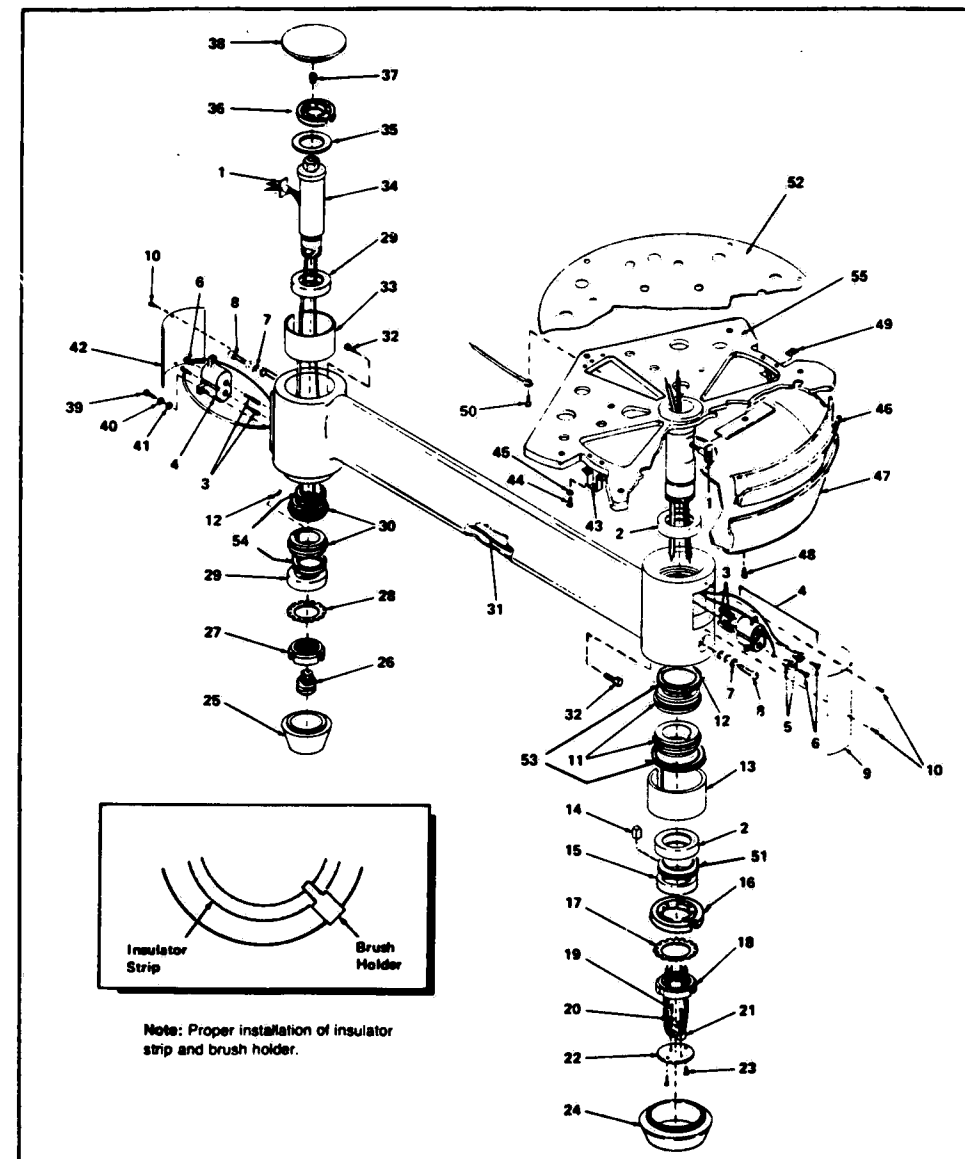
HORIZONTAL ARM ASSEMBLY (Two-wire Centra 360).
